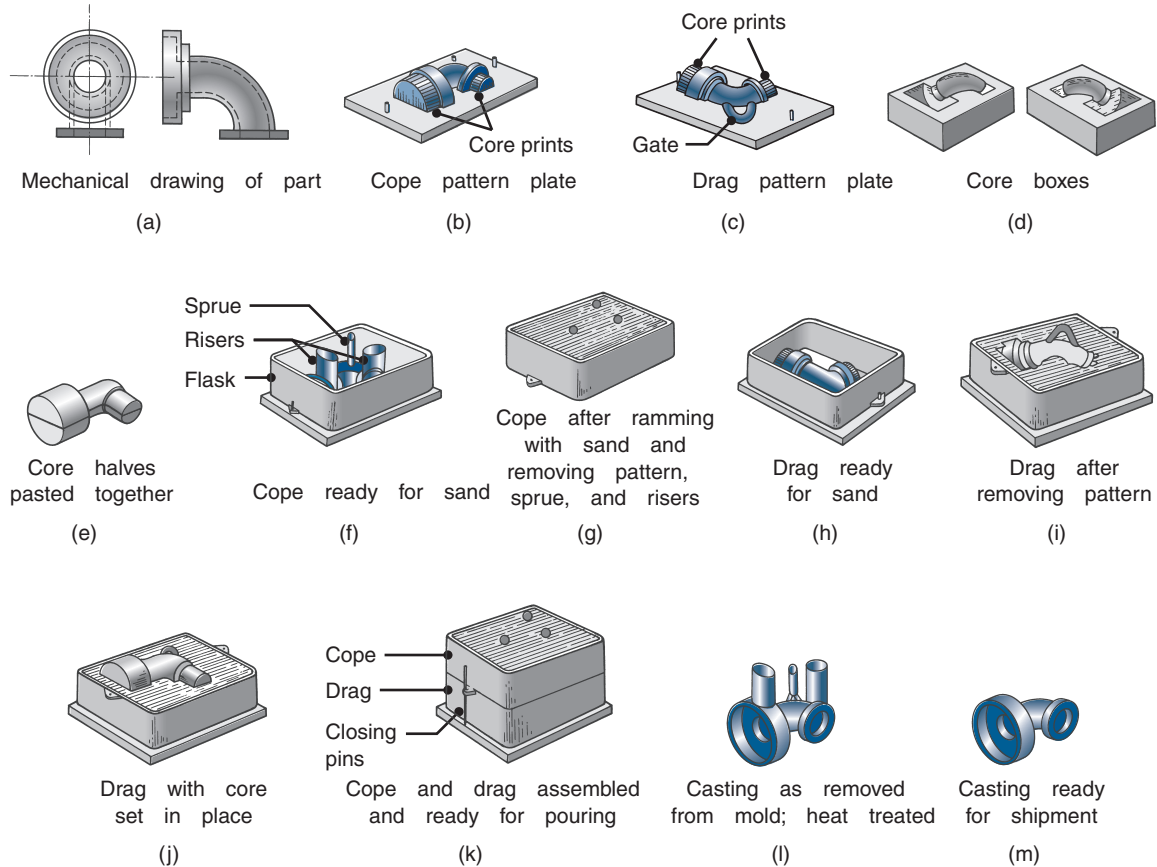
Schematic illustration of the sequence of operations for sand casting. (a) A mechanical drawing of the part is used to generate a design for the pattern. Considerations such as part shrinkage and tapers must be built into the drawing. (b, c) Patterns have been mounted on plates equipped with pins for alignment. Note the presence of core prints designed to hold the core in place. (d, e) Core boxes produce core halves, which are pasted together. The cores will be used to produce the hollow area of the part shown in (a). (f) The cope half of the mold is assembled by securing the cope pattern plate to the flask with aligning pins and attaching inserts to form the sprue and risers. (g) The flask is rammed with sand and the plate and inserts are removed. (h) The drag half is produced in a similar manner with the pattern inserted. A bottom board is placed below the drag and aligned with pins. (i) The pattern, flask, and bottom board are inverted; and the pattern is withdrawn, leaving the appropriate imprint. (j) The core is set in place within the drag cavity. (k) The mold is closed by placing the cope on top of the drag and securing the assembly with pins. The flasks then are subjected to pressure to counteract buoyant forces in the liquid, which might lift the cope. (l) After the metal solidifies, the casting is removed from the mold. (m) The sprue and risers are cut off and recycled, and the casting is cleaned, inspected, and heat treated (when necessary). *Source:* Courtesy of the Steel Founders' Society of America.
